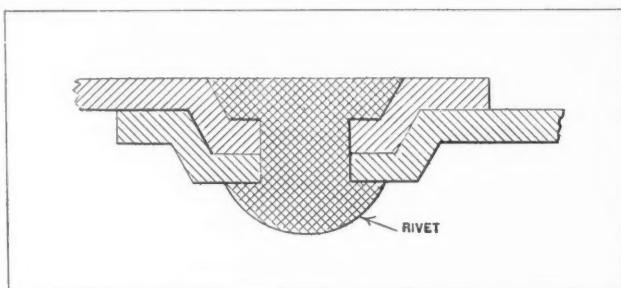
Cross-section through Countersunk Rivet and Metal Sheets
